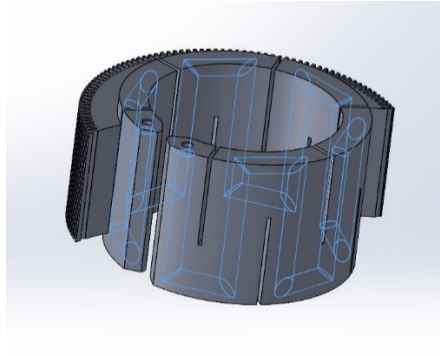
Motor Cooling Jacket Cross Section and the One Single Pipe Line.
